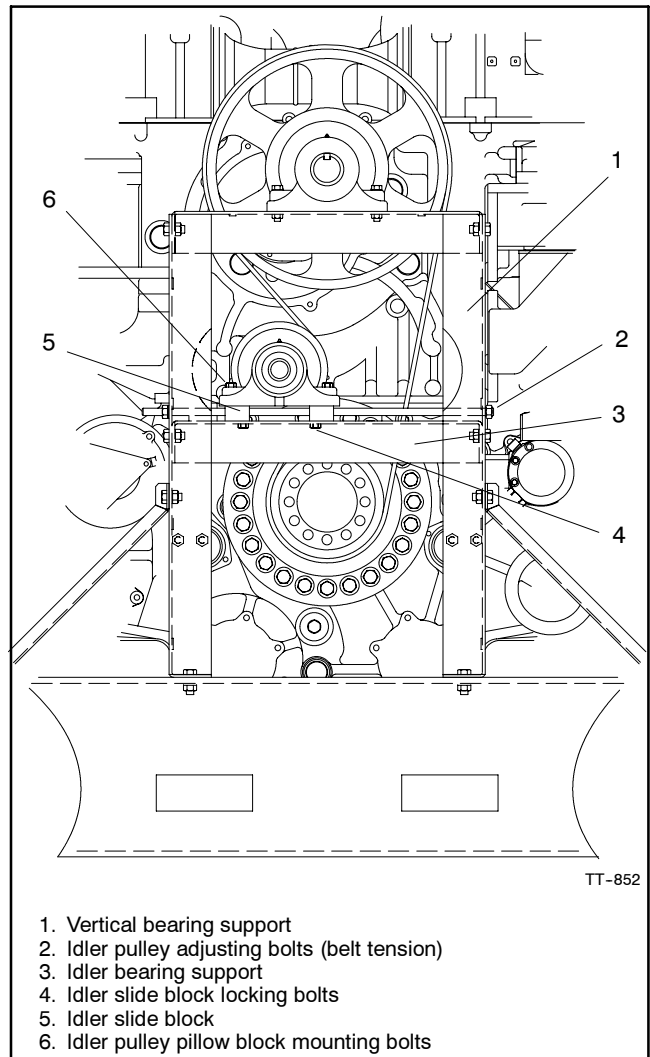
Idler Pulley Pillow Block Mounting on Fan-Bearing Support, Rear View
